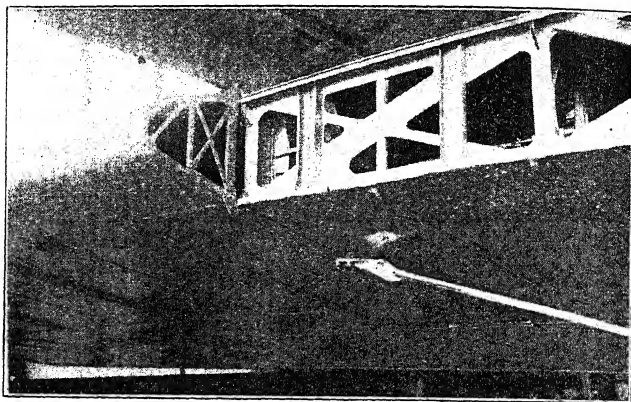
ROHRBACH WING GIRDER CONSTRUCTION
